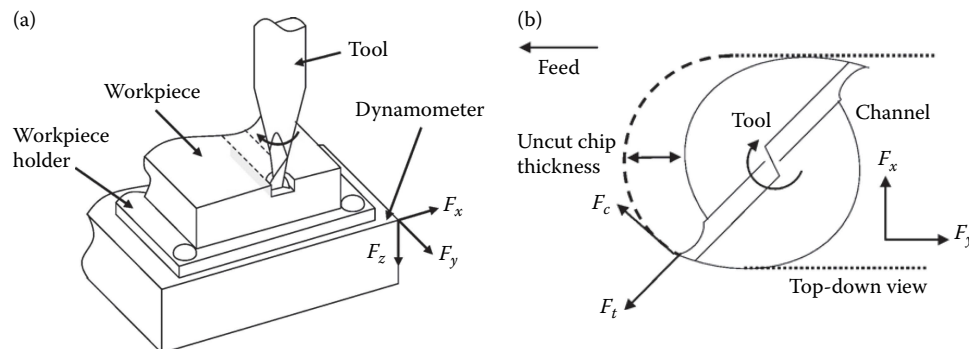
Schematic of micro milling: (a) 3D view of experiment; (b) end view of the cutting process with tool geometry
